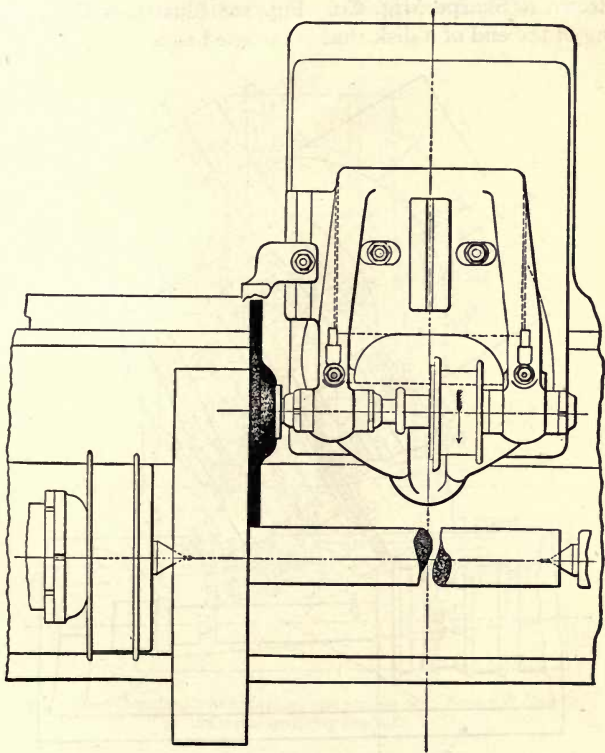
Grinding the side of a disc on a Brown & Sharpe universal grinding machine.
